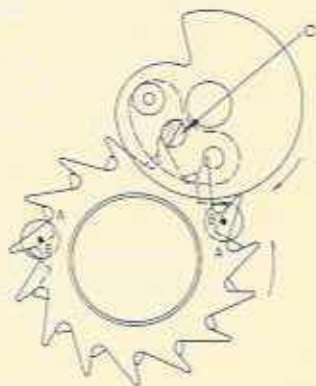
The balance is moving clockwise on its return trip. The jewel pin strikes the contact wheel tooth.
